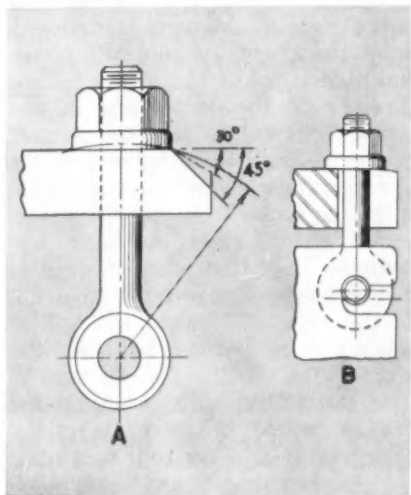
(A) Drawing of assembly showing that 30 or 45-degree angle does not affect speed with which assembly can be released; (B) assembly with removable swinging bolt.
